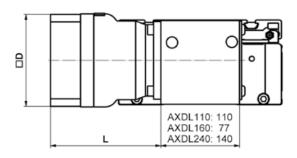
Dimensions AXDL with integated planetary gearbox version ZP and ZE
